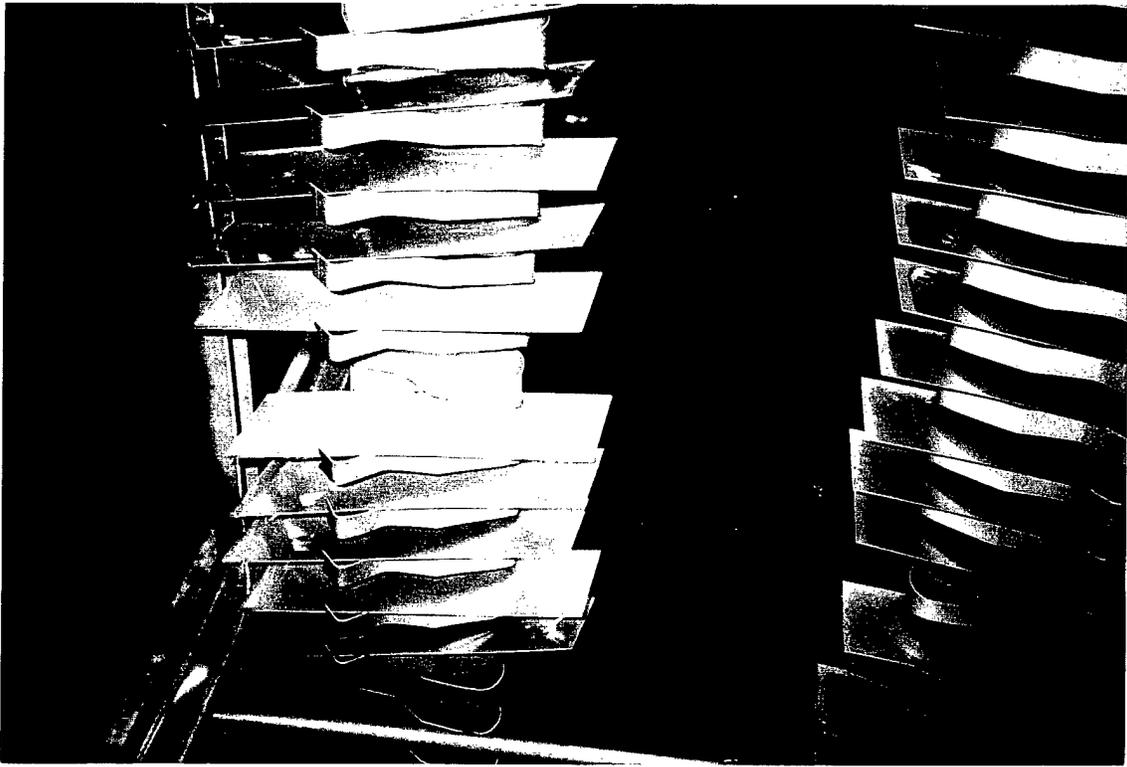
Conversion-coated panels immediately after removal from the reagent tank.
